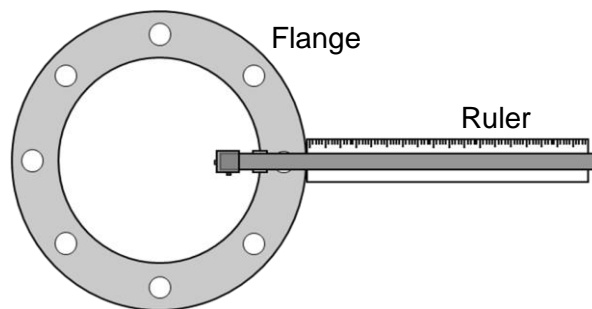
Probe design; top view sketch of the probe and flange ring shows the attached ruler.
